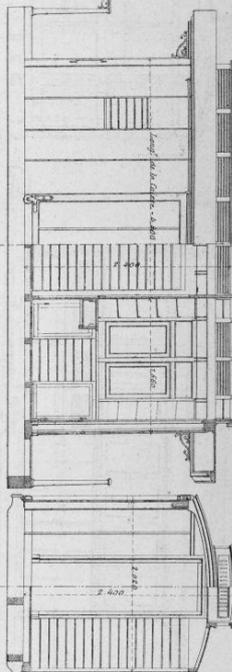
Coupe et Vue par le bout (cross-section and end view) of the fourgon.
